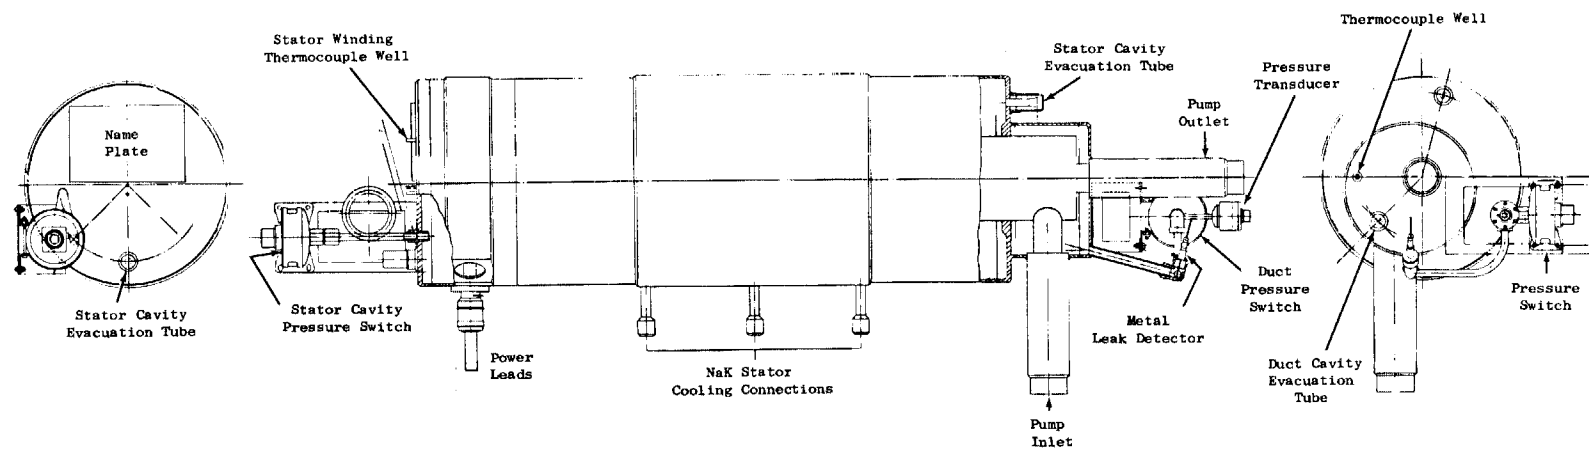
Layout Drawing of Assembled EM Boiler Feed Pump With Attached Instrumentation Items for Cavity Pressure and Metal Leak Measurements.
